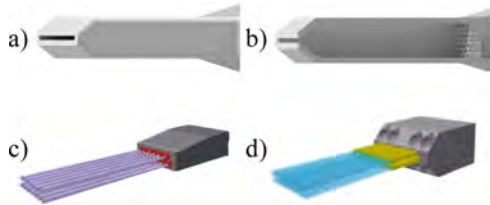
Sketch of the investigated nozzles: a) 3D-printed nozzle; b) 3D-printed nozzle with honeycombs; c) modular nozzle; d) needle nozzle
